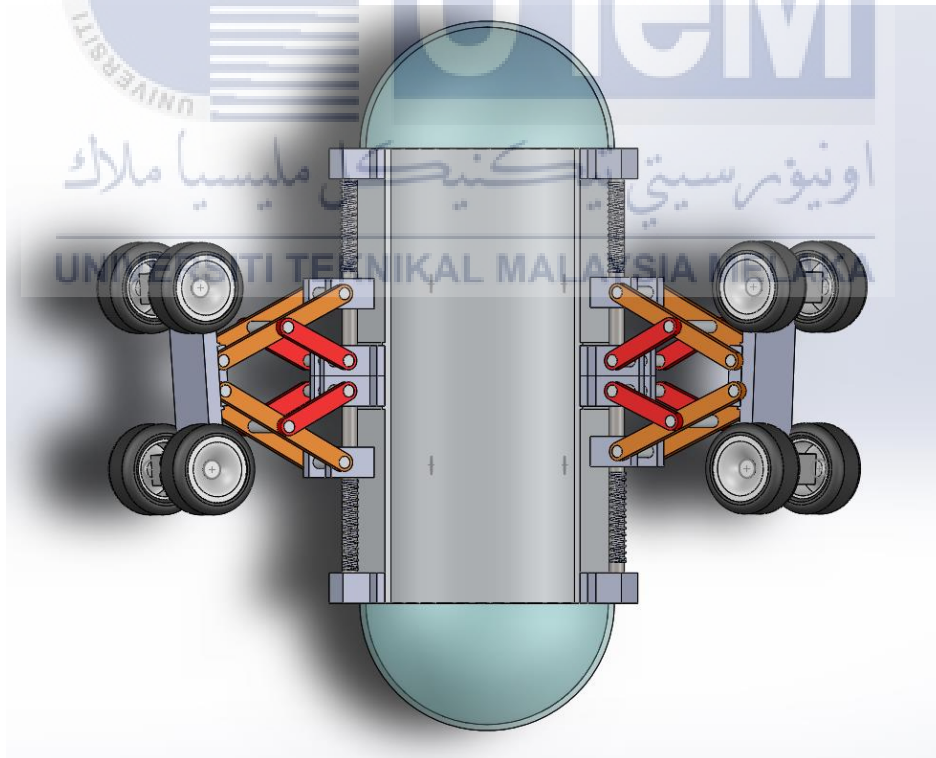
The Top Plane View of the Designed Pipeline Inspection Robot
